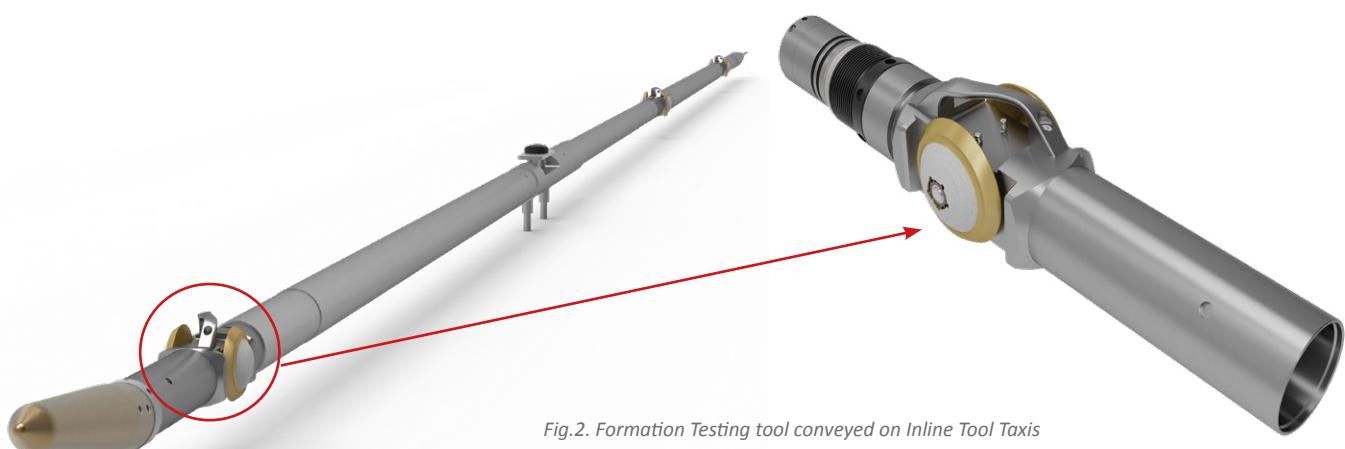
Formation Testing tool conveyed on Inline Tool Taxis
